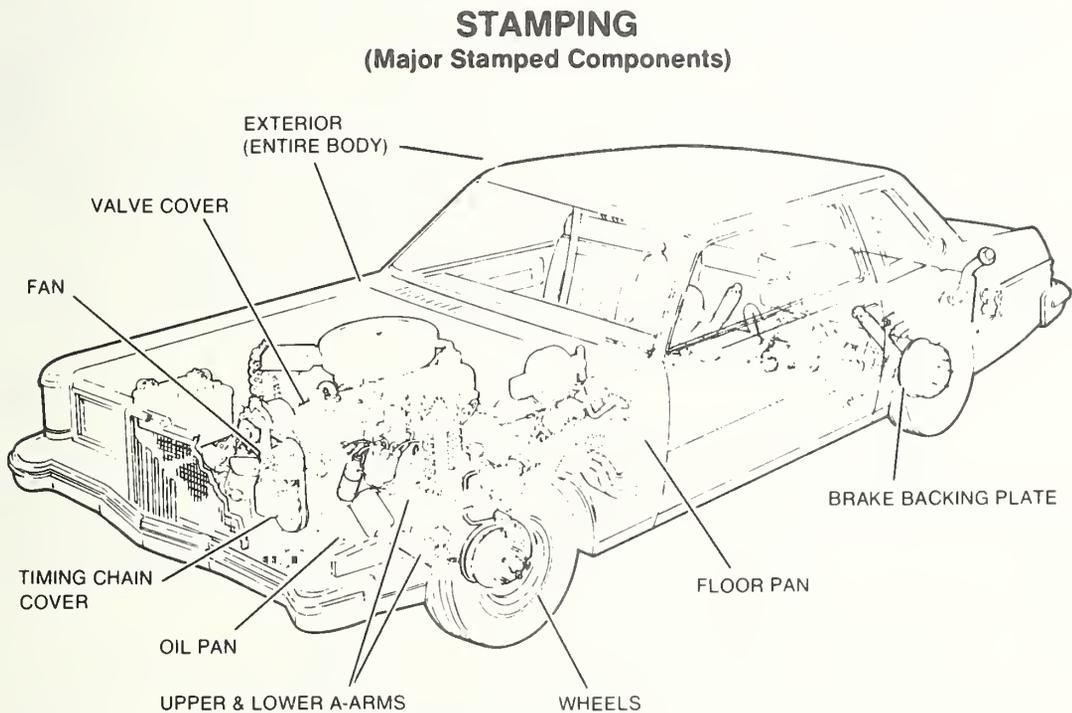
SCHEMATIC OF AUTOMOBILE SHOWING COMPONENTS WHICH ARE STAMPED
